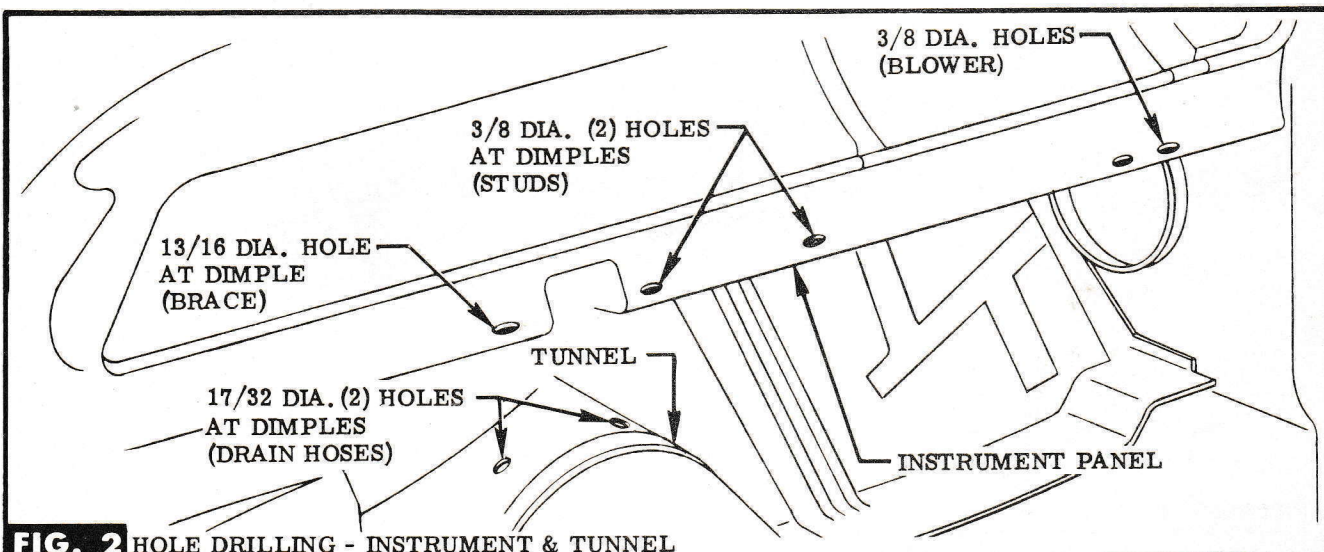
HOLE DRILLING - INSTRUMENT & TUNNEL
